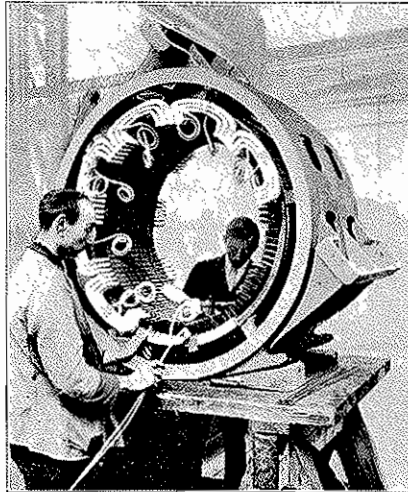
Partly wound stator of 250 B.H.P. slipringmotor.
